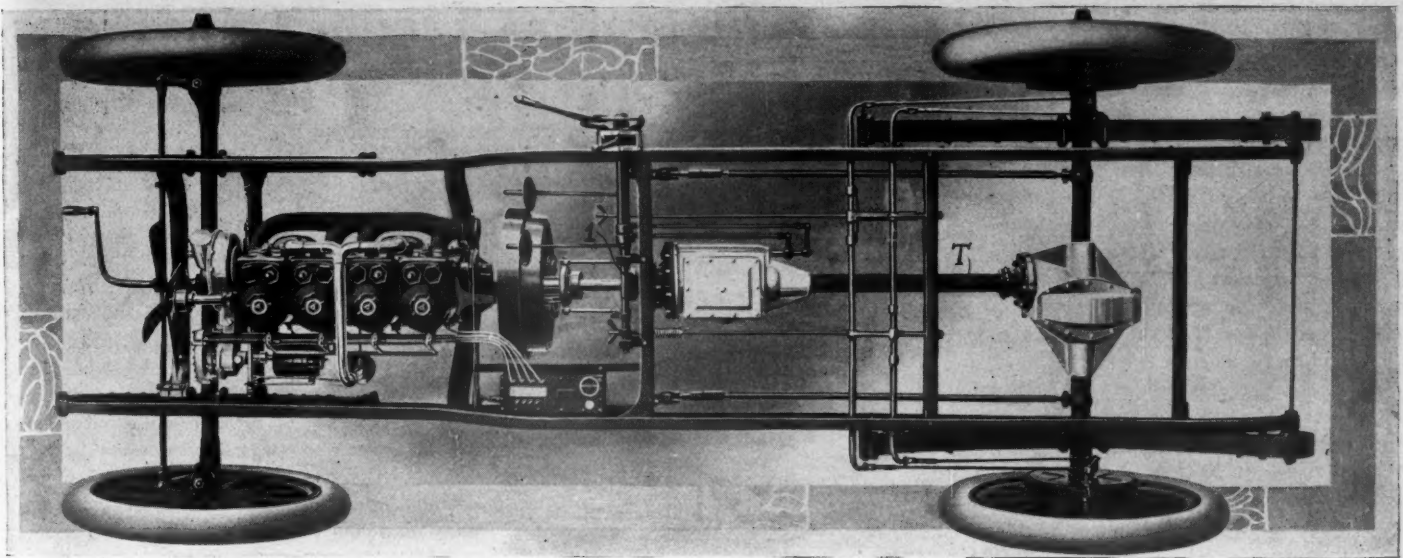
THE GEARBOX IS A UNIT WITH THE PROPELLERSHAFT HOUSING —1 UNIVERSAL JOINT, T PROPELLERSHAFT TUBE
